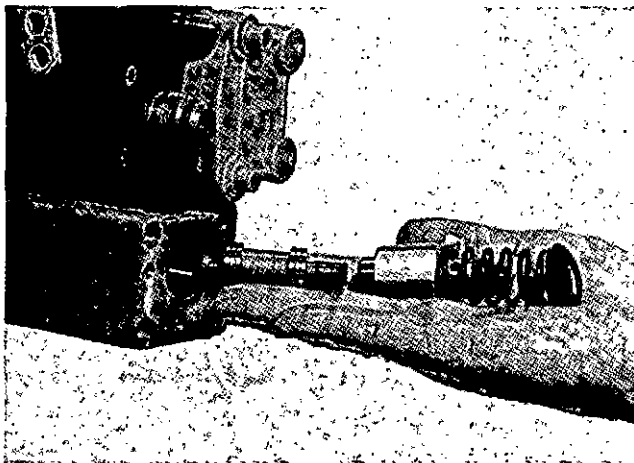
, (F5384). Remove the lower PT (type H) governor spring assembly.
